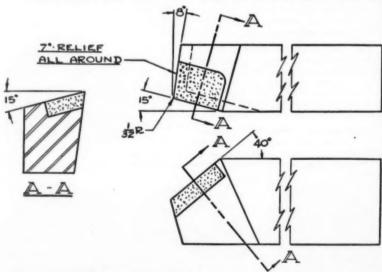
Tool with extreme negative rake used to obtain a "shear" cut. This tool is best suited to roughing cuts on large diameters. It is not recommended for most finish cuts because chip curls toward work and spoils the finish.
